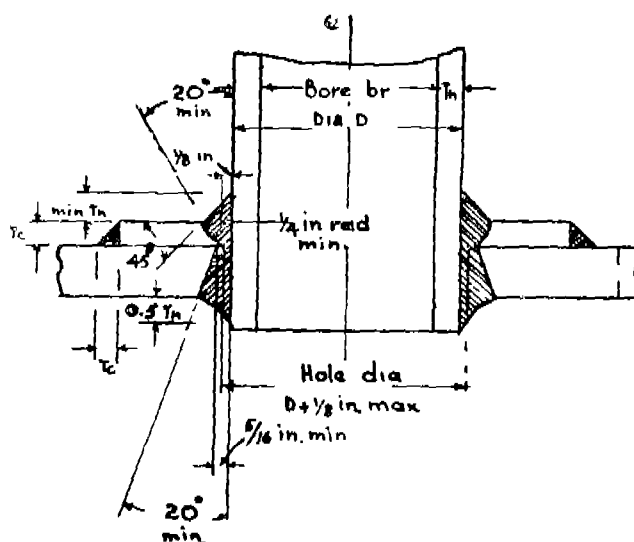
MINIMUM WELD ATTACHMENT FOR STAND PIPES OVER 5" BORE
